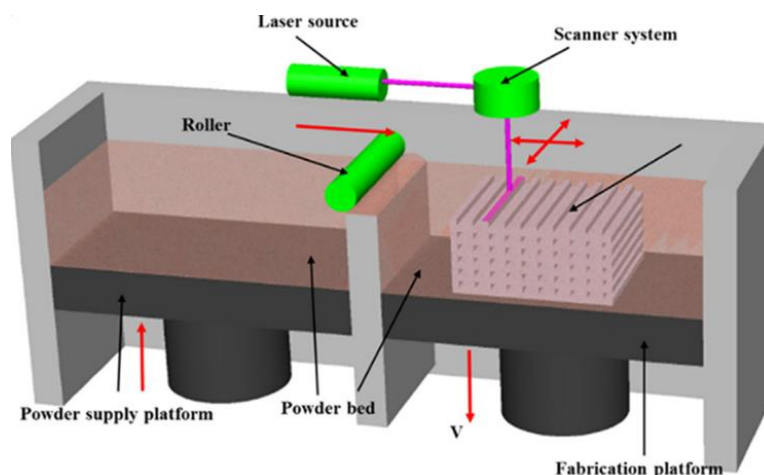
Schematic display of SLS 3D printer assembly and working principle (15)
